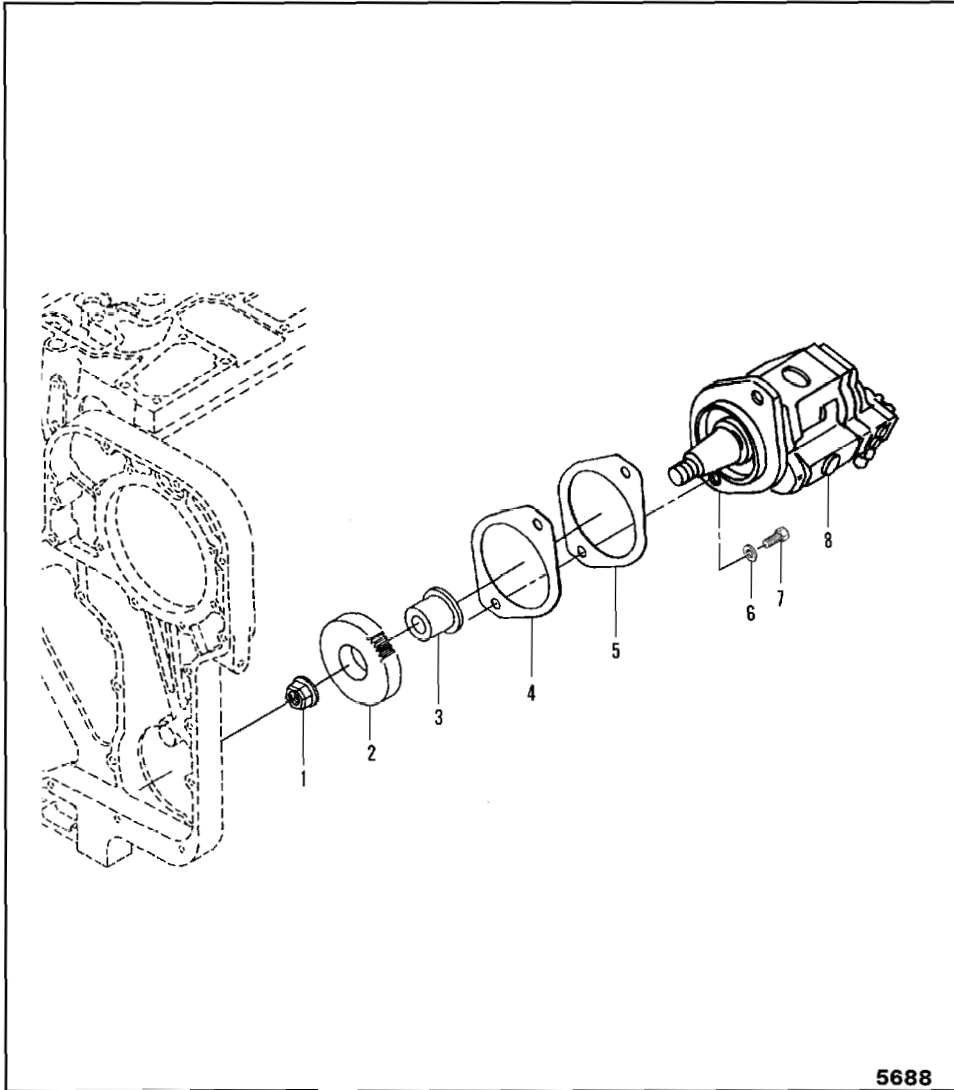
EXPLODED VIEW OF STEERING & BRAKE PUMP MOUNTING
